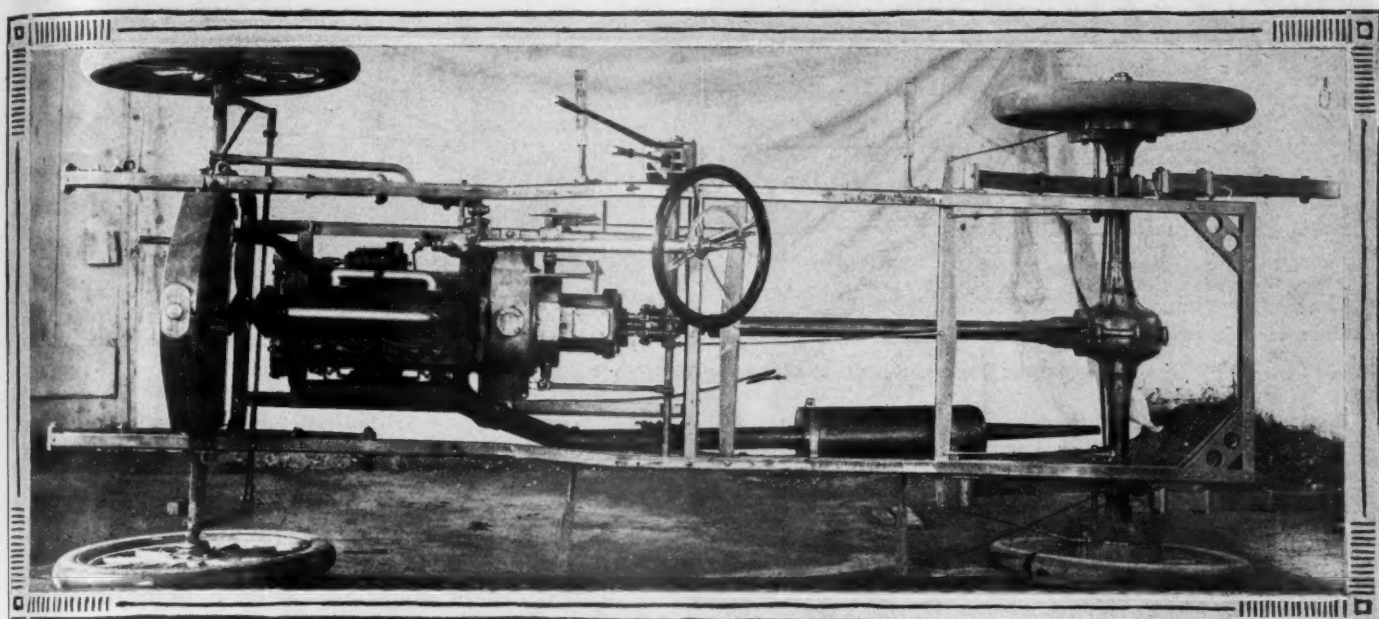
TOP VIEW OF CHASSIS OF NEW BADGER MOTOR CAR
